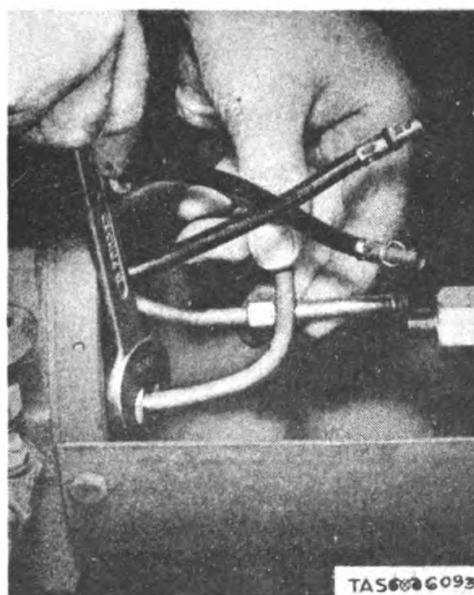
Removing Inner Discharge Tubing by Loosening Adapter Nuts at Either End.
